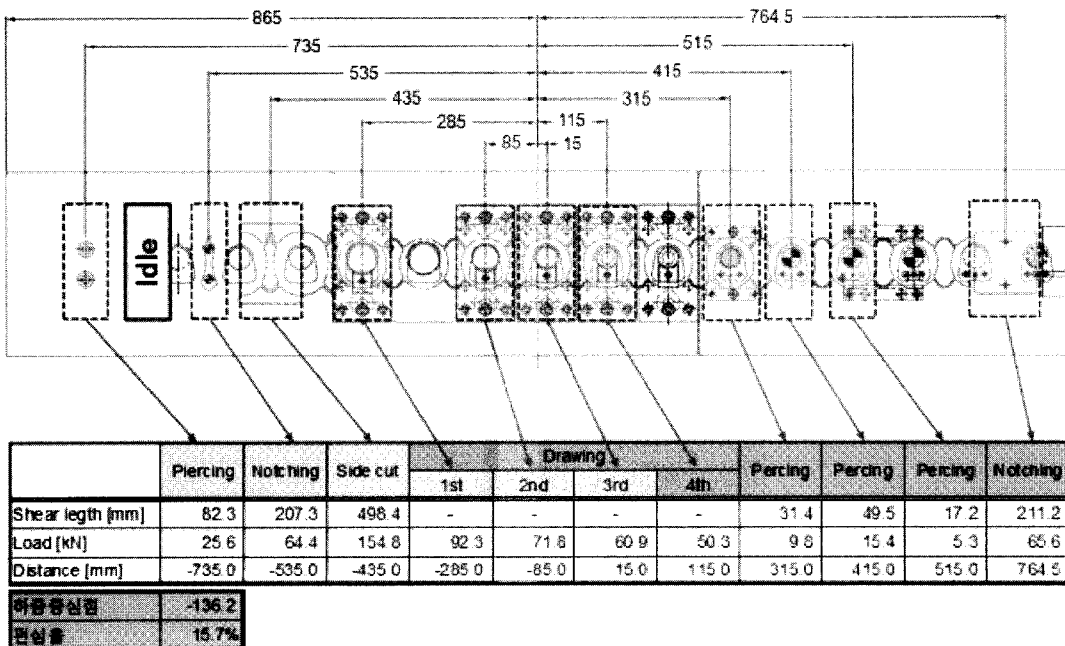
Forming and cutting load of the product, Bracket-RR Seat Back
